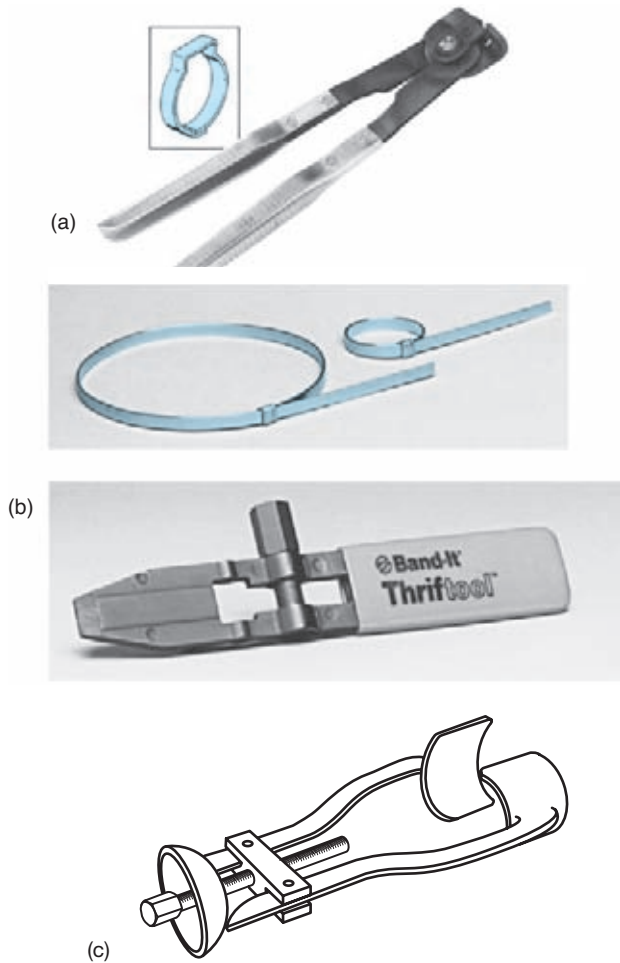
The major styles of boot clamps (shown with their installation tools) are an adjustable clamp (a), an adjustable band (b), and a fixed-size ring (c). (a is courtesy of Plews; b is courtesy of Band-It)
